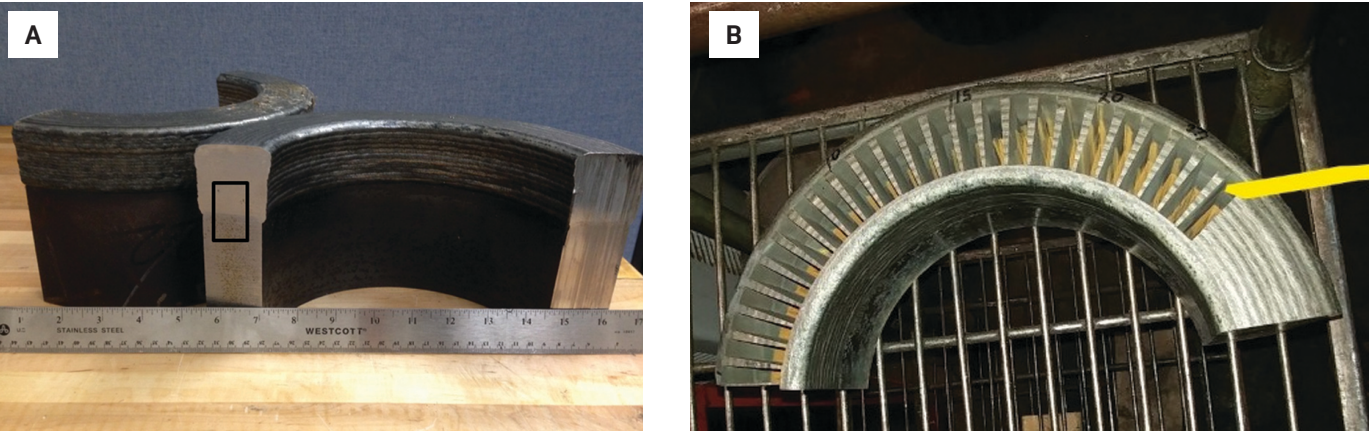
A — F22/625 dissimilar metal weld coupon; B — coupon after EDM machining of DHCT samples.
